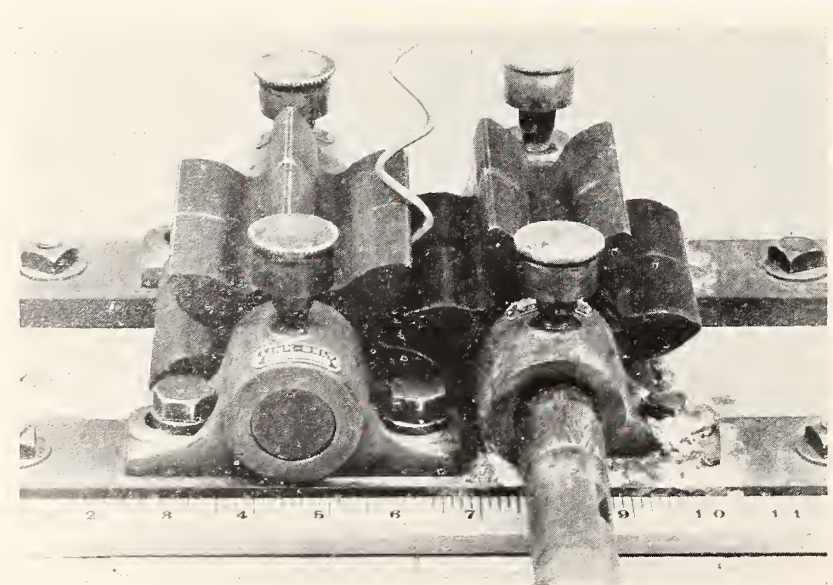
Machine for crimping wire. Straight wire coming from below is crimped by passing between two loosely meshed gears. Only part of the crank shaft is shown.
